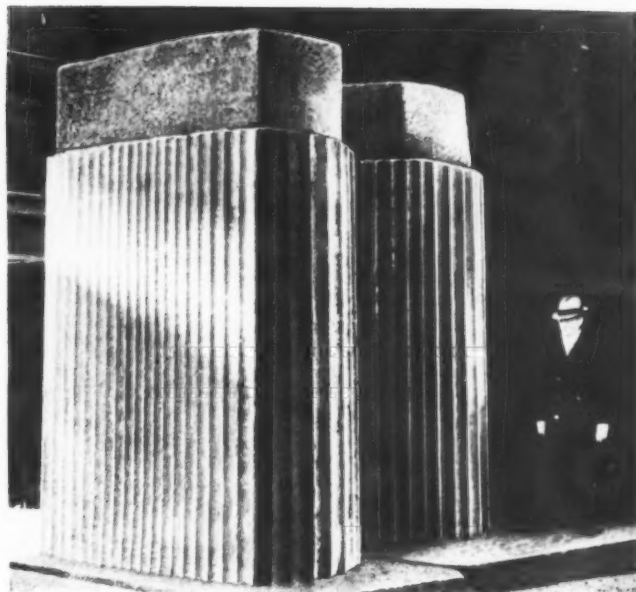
Ingots Weighing 110,000 Pounds Each are Used for Making the Plate from which the Flywheel was Flame-cut
